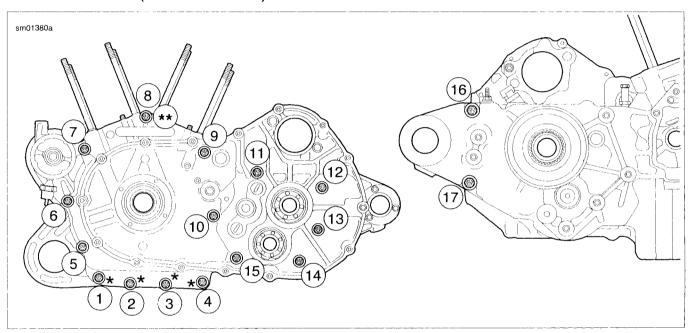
Crankcase Fastener Torque Sequence (XR Models: * short fasteners;  double-ended bolt)
